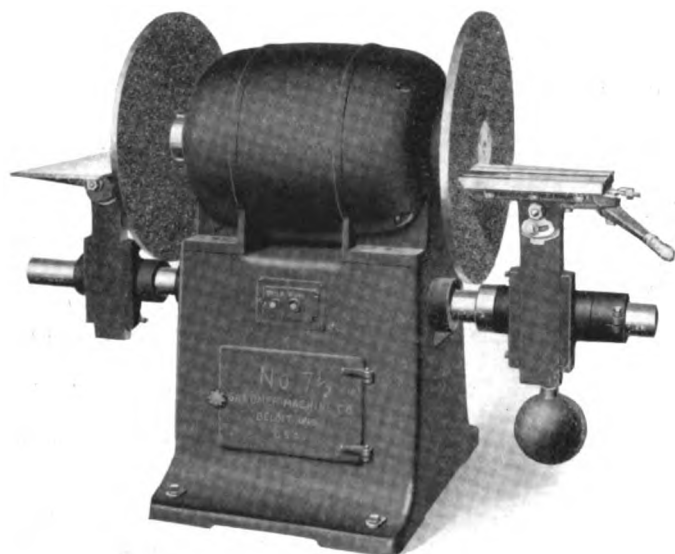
No. 7½ Gardner Grinder, Single Spindle
